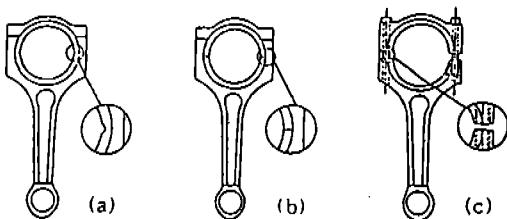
Fracture splitting process by Krebsöge: (a) V-shape groove shaped during the compaction of preforms, (b) then closed into a short crack, (c) fracture splitting of the cap from the rod.
